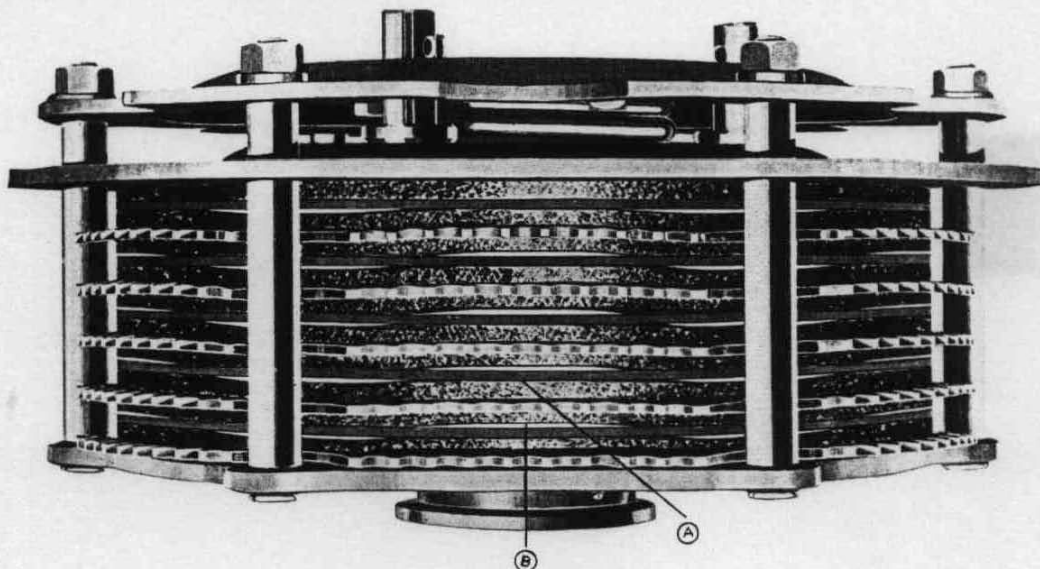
Clutch Assembly Shown in Partial Engagement.
